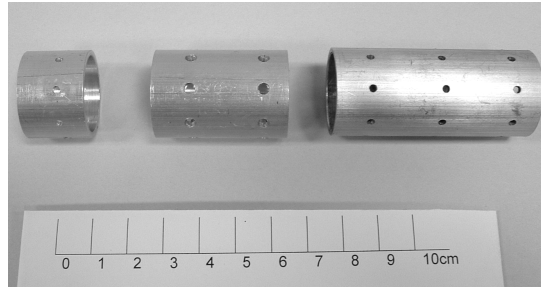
The sleeves in three sizes showing 2mm and 3mm holes
